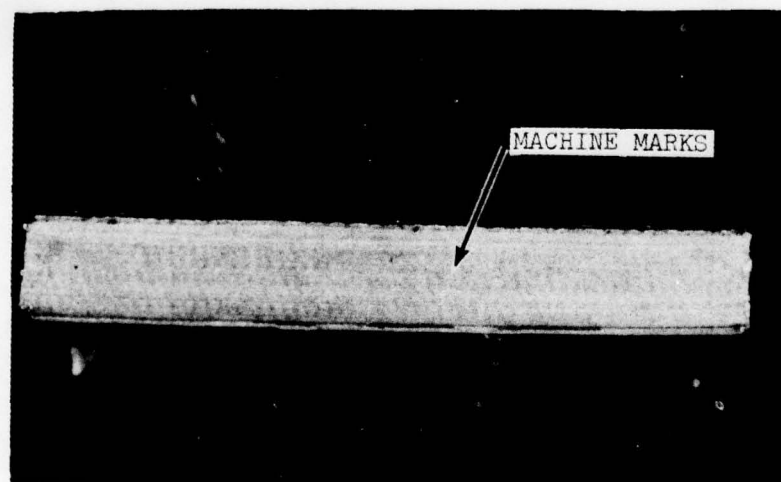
FRACTURE SURFACE THROUGH BOND JOINT OF BEND TEST SPECIMEN PRE-FORM S/N 3.
